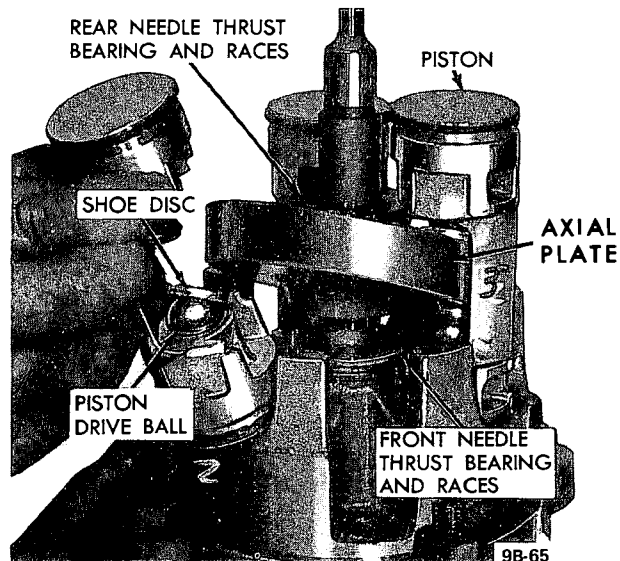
B-91 Disassembly of Cylinder Assembly - 6 Cylinder Compressor
